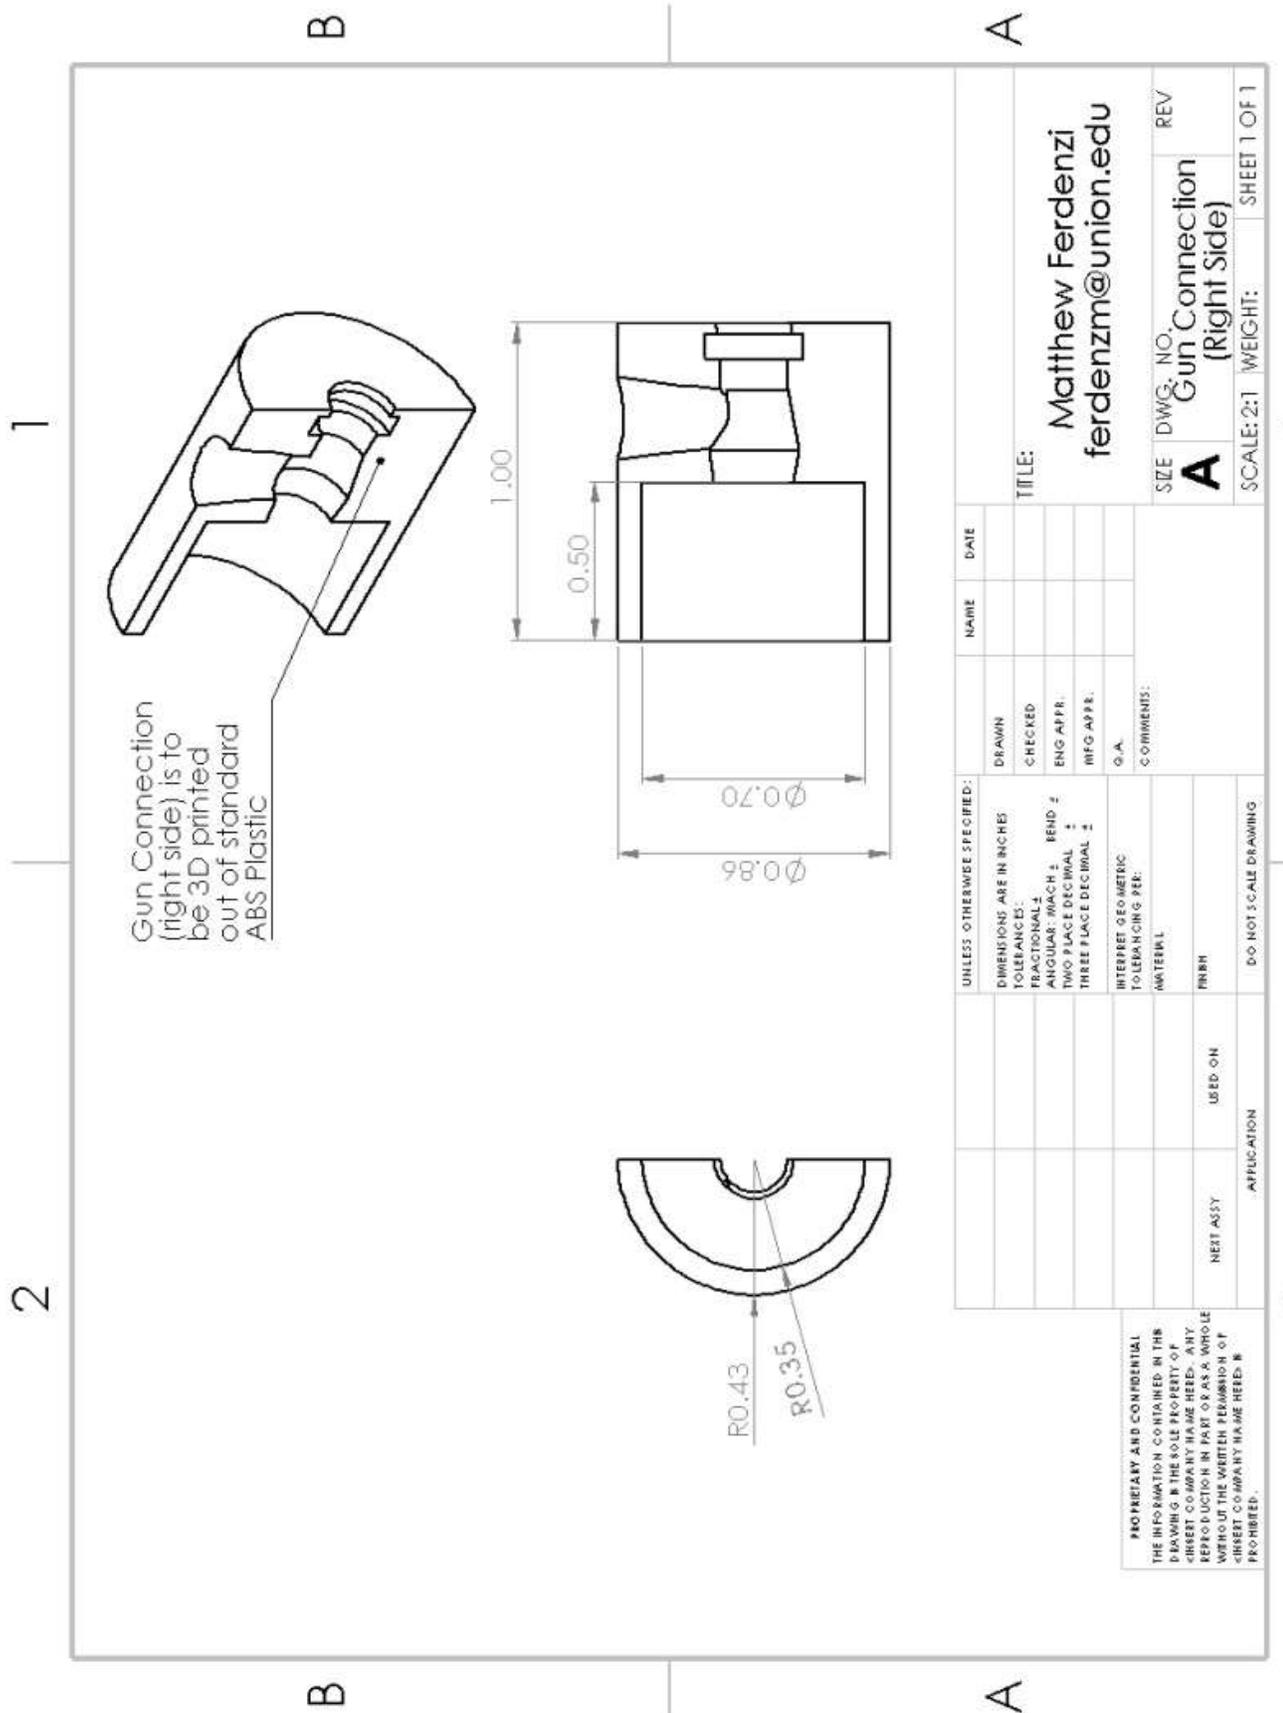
SolidWorks drawing of the right side of the gun connection.
